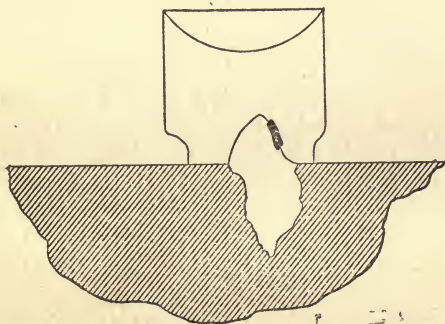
SHRINK HOLE. DOTTED OUTLINE SHOWS POSITION OF RISER
